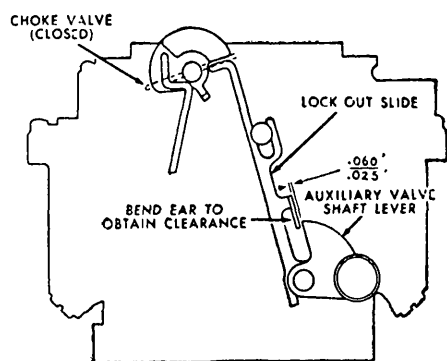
Lockout slide adjustment with choke valve closed. Stromberg Series 4A
